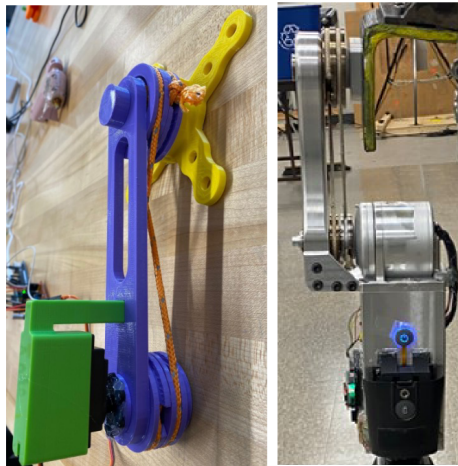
Prosthesis designed by S. Mroz. Left : 3D-printed prototype; right : frontal plane view of the final version. [20]
